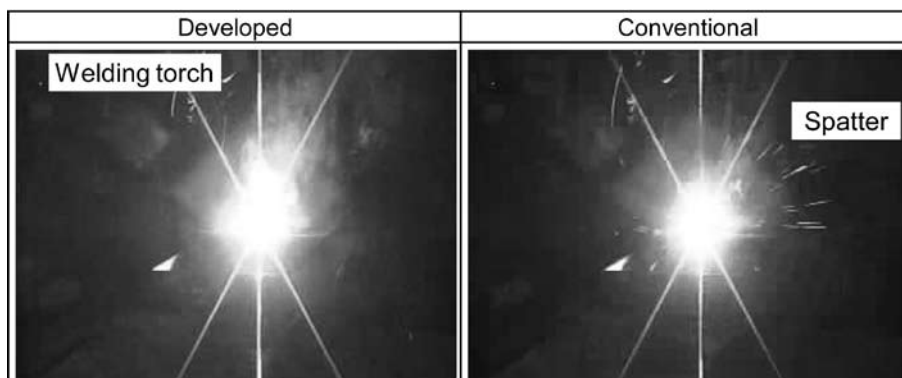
Comparative welding scene of DD50S(YGW15).
